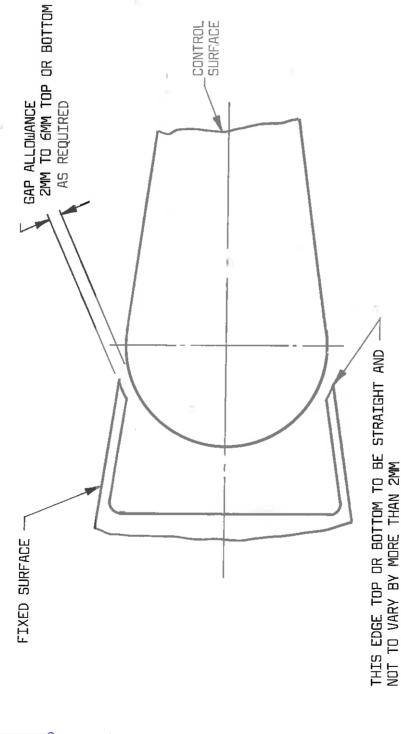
SECTION BASED ON ELEVATOR FLAP AND AILERON SIMILAR
